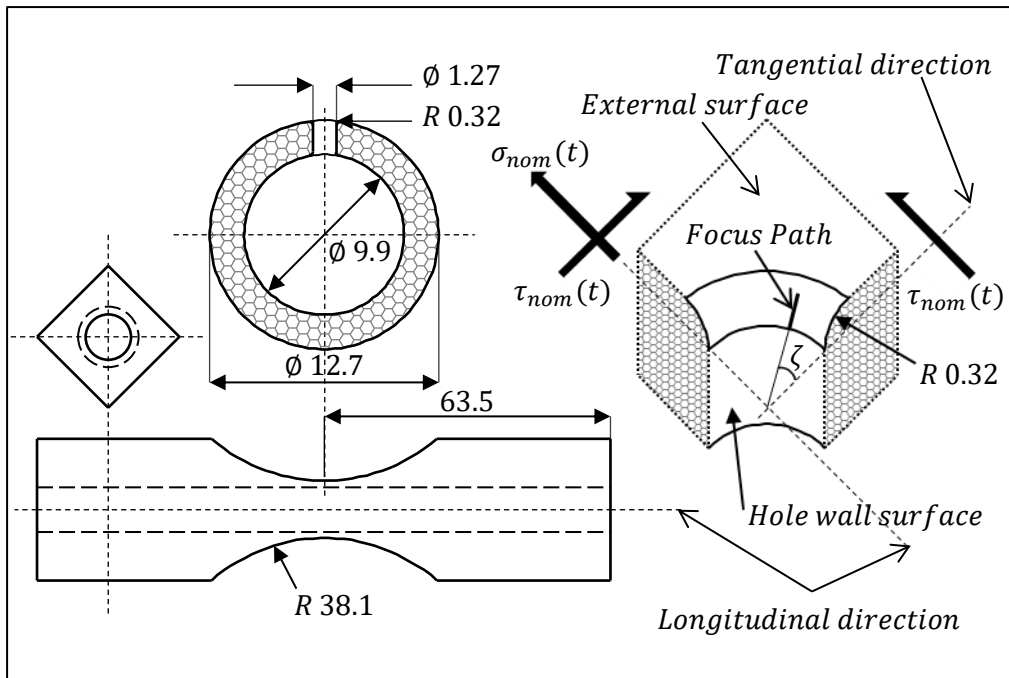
Macro-holed cylindrical samples subjected to combined bending and torsion [142], defining the focus path and angle ζ
